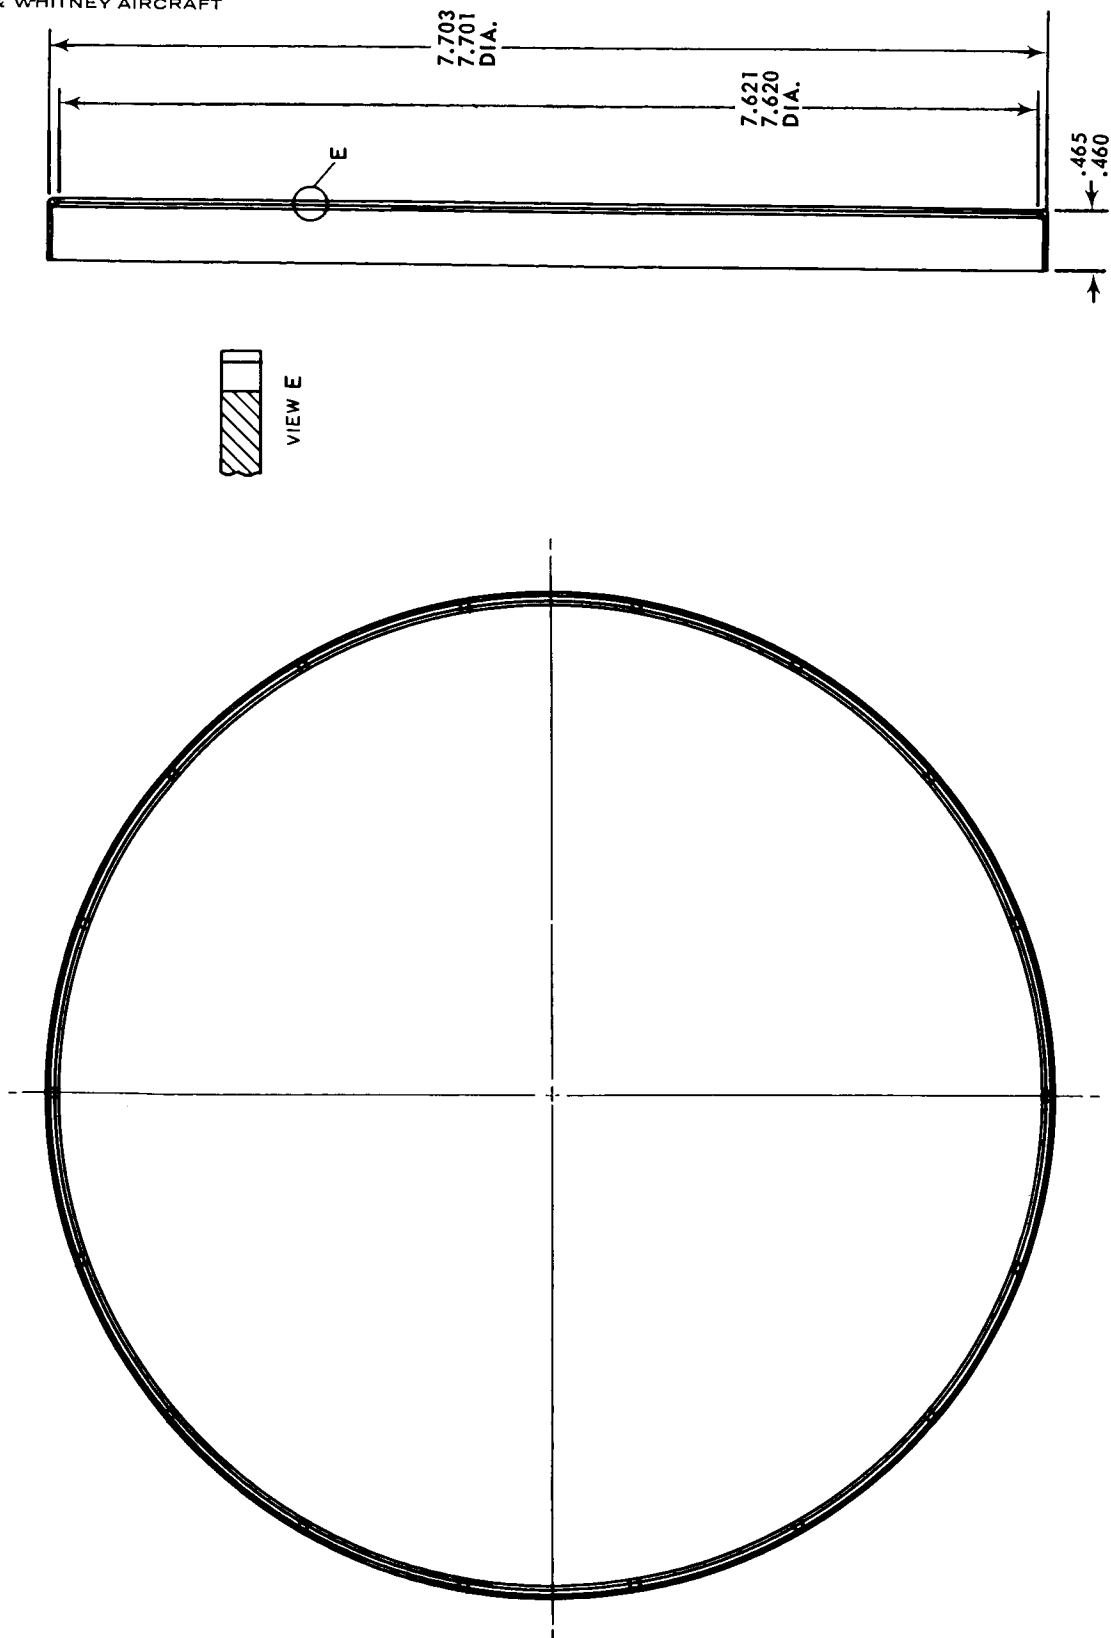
Alignment Ring For Face Contact Bellows Secondary Seal
